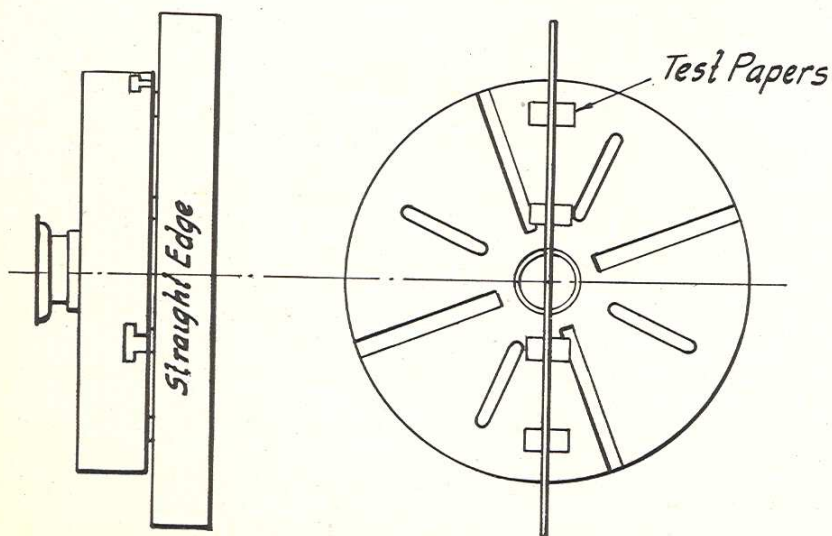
Showing Method of Testing Accuracy of Large Face Plates.
